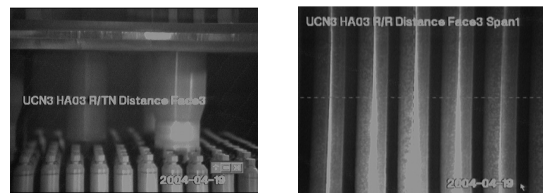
Shoulder Gap and Rod Spacing Measurement
